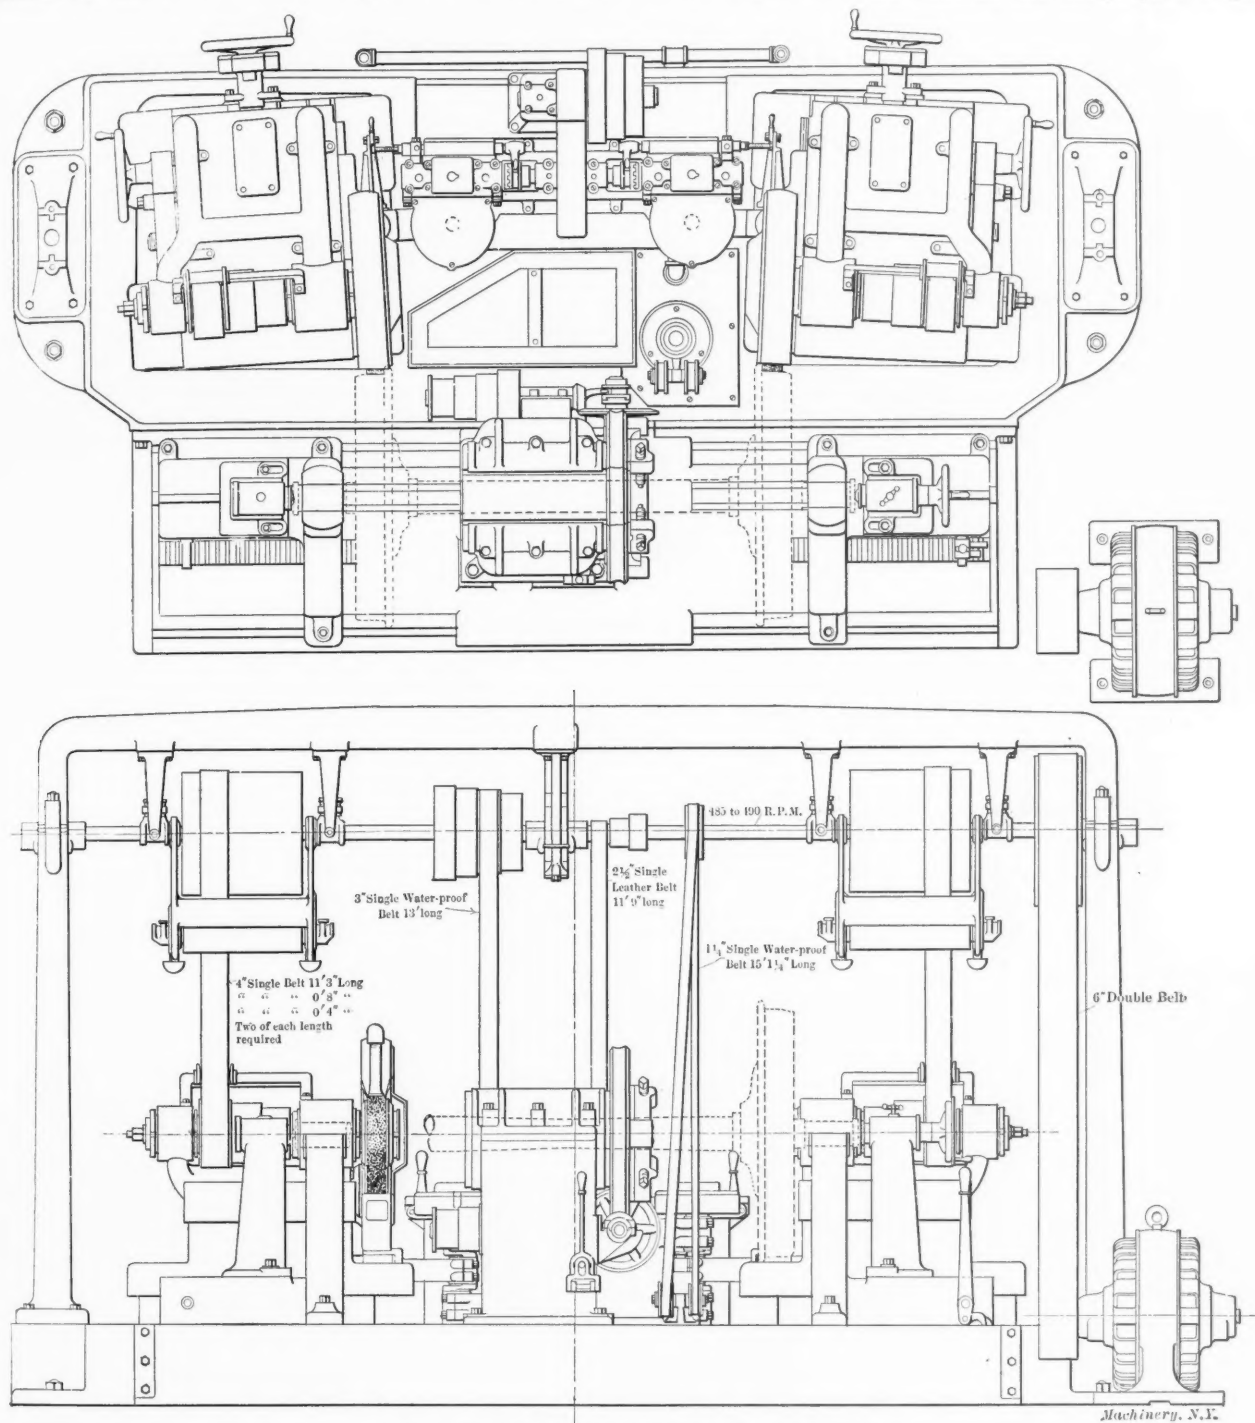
Plan and Elevation of Norton Car Wheel Grinder.
